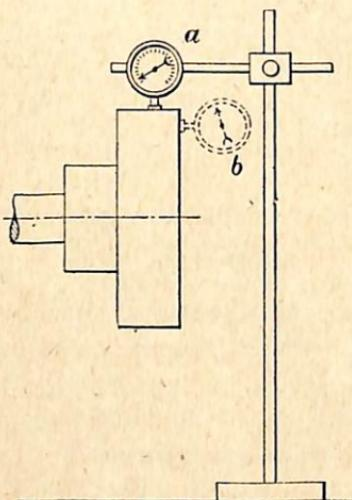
Checking truth of single half-coupling with dial indicator. (a) periphery; (b) face
